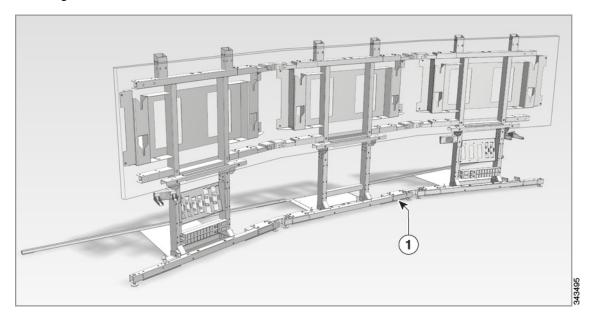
Attaching the Center Floor Bracket (2 of 3)—Floor Bracket Part Numbering
